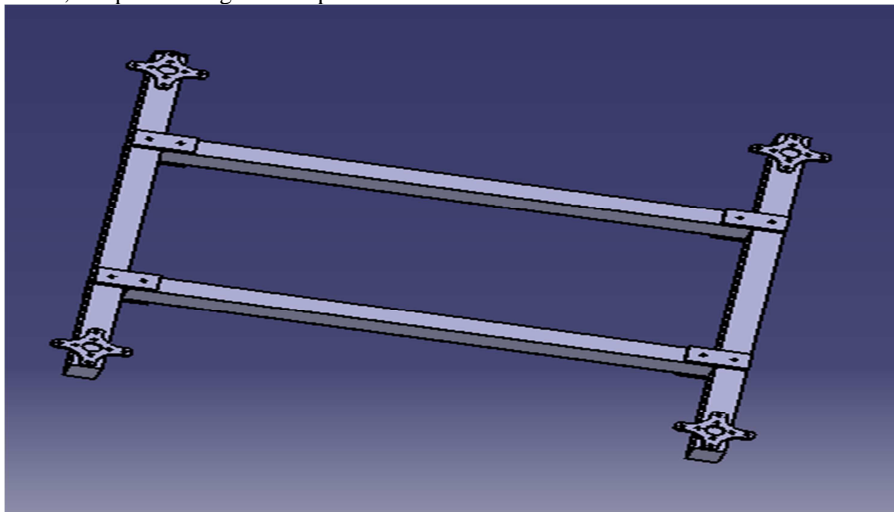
3-D CAD model of quadcopter frame with motor plate
